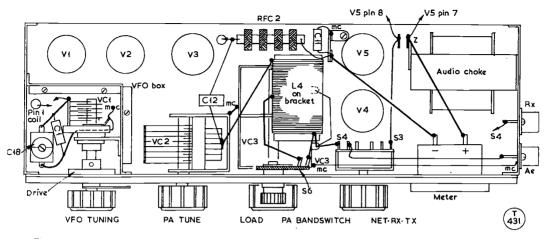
Upper chassis layout for the transmitter described in the article. By using the chassis dimensions recommended and keeping fairly closely to this plan, a compact and efficient parts arrangement would be achieved.
